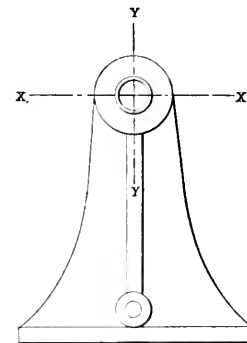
BEARING FOR SHAFT SHOWN IN FIG. 7
